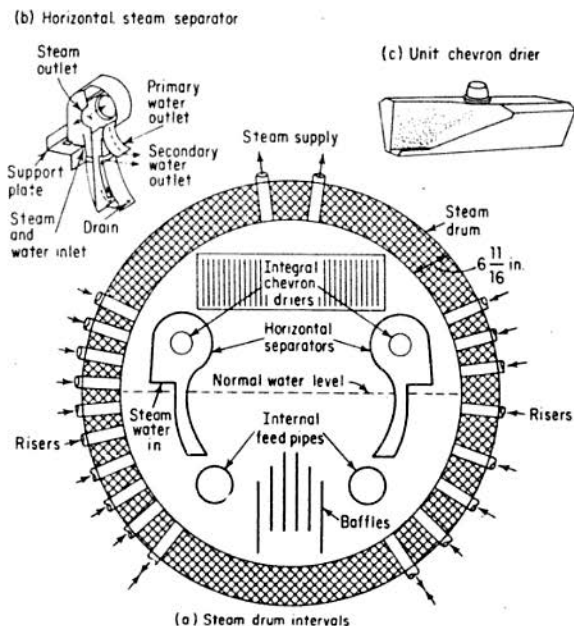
Steam drum has horizontal steam separator and integral chevron drier.
